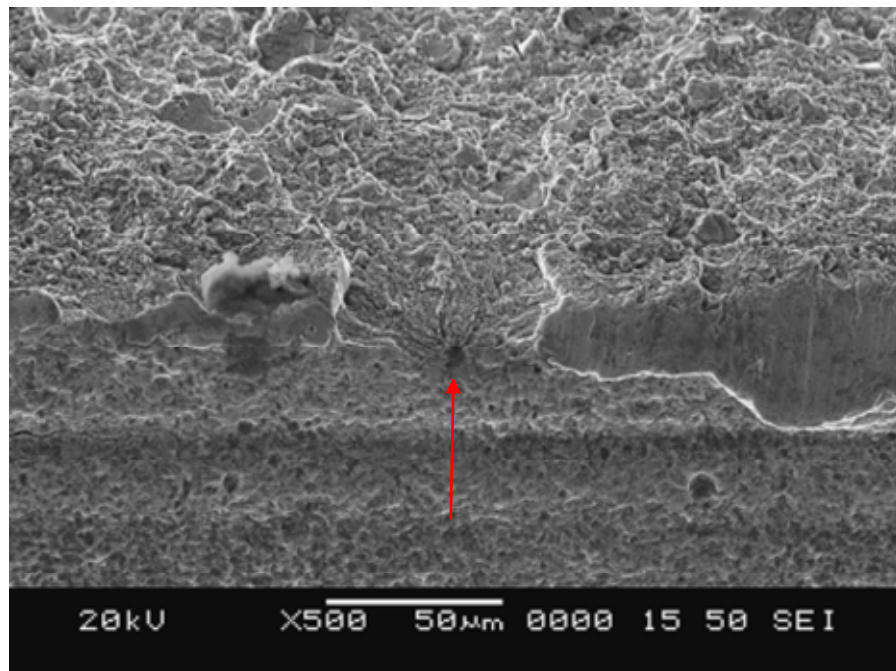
Tooth 2 drive side primary pit origin, tooth half.
